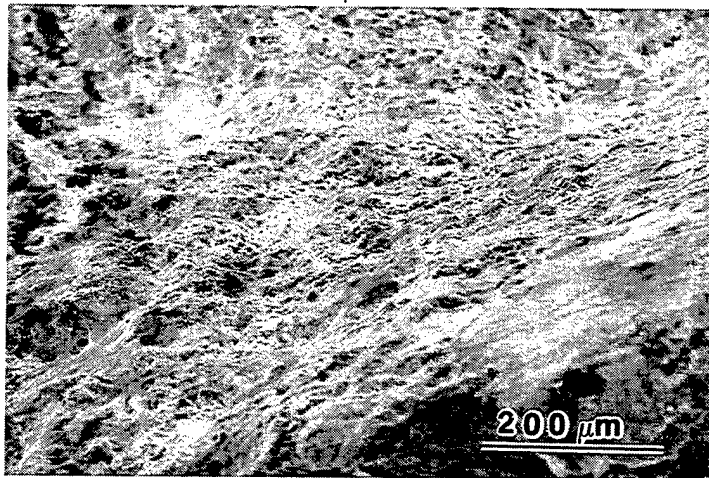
SEM of fracture surface that progressed into the weld metal as seen in Figure 4.36.
